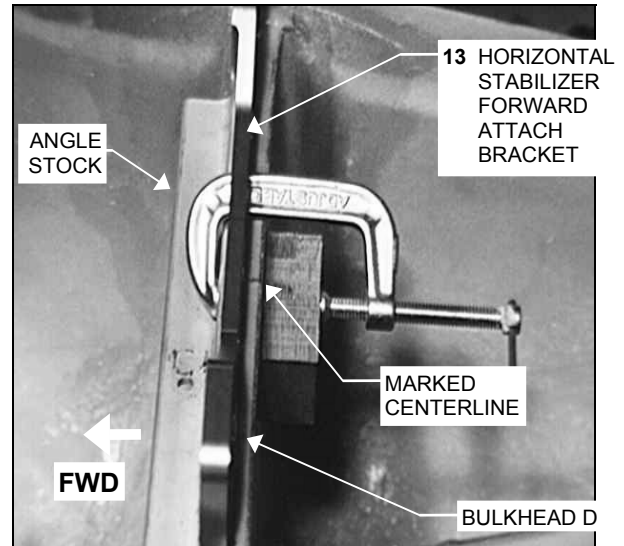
Clamping the Stabilizer Attach Bracket to Bulkhead D
